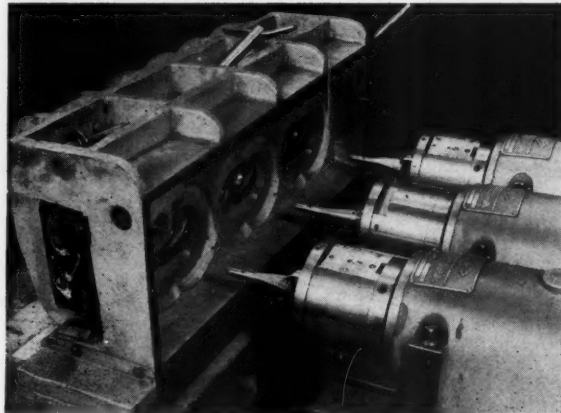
The tooling set up on the machine shown in Fig. 17.
